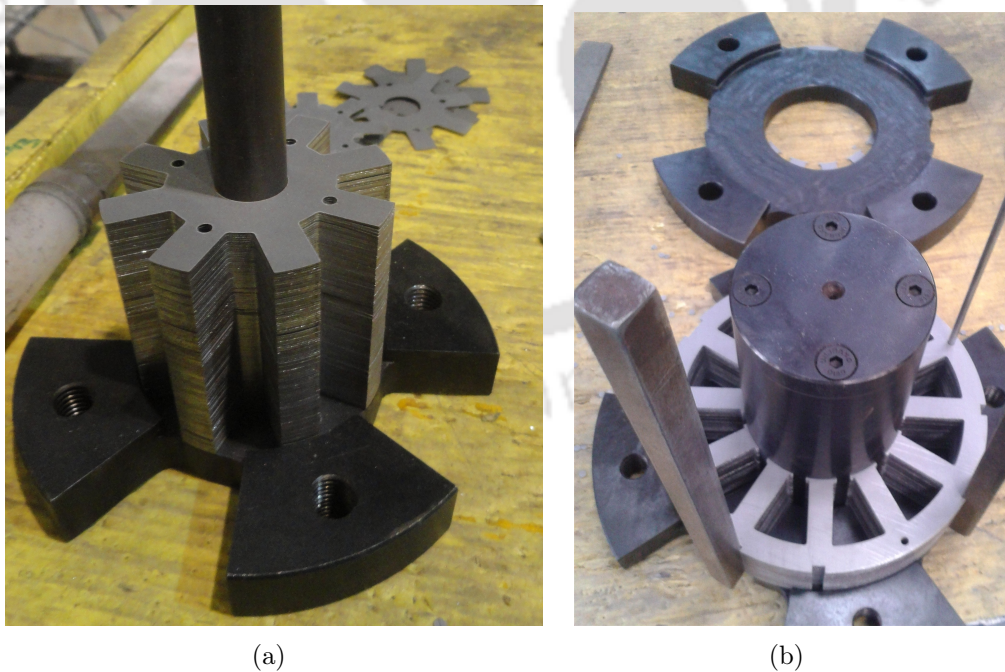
Stacking of laminated steel sheets for (a) rotor and (b) stator
